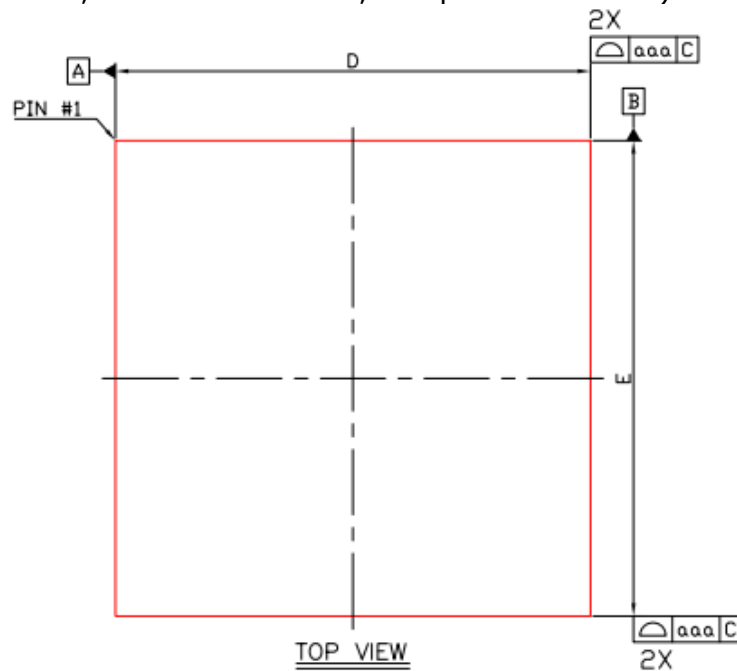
RK618 TFBGA(HF) Package Top View
